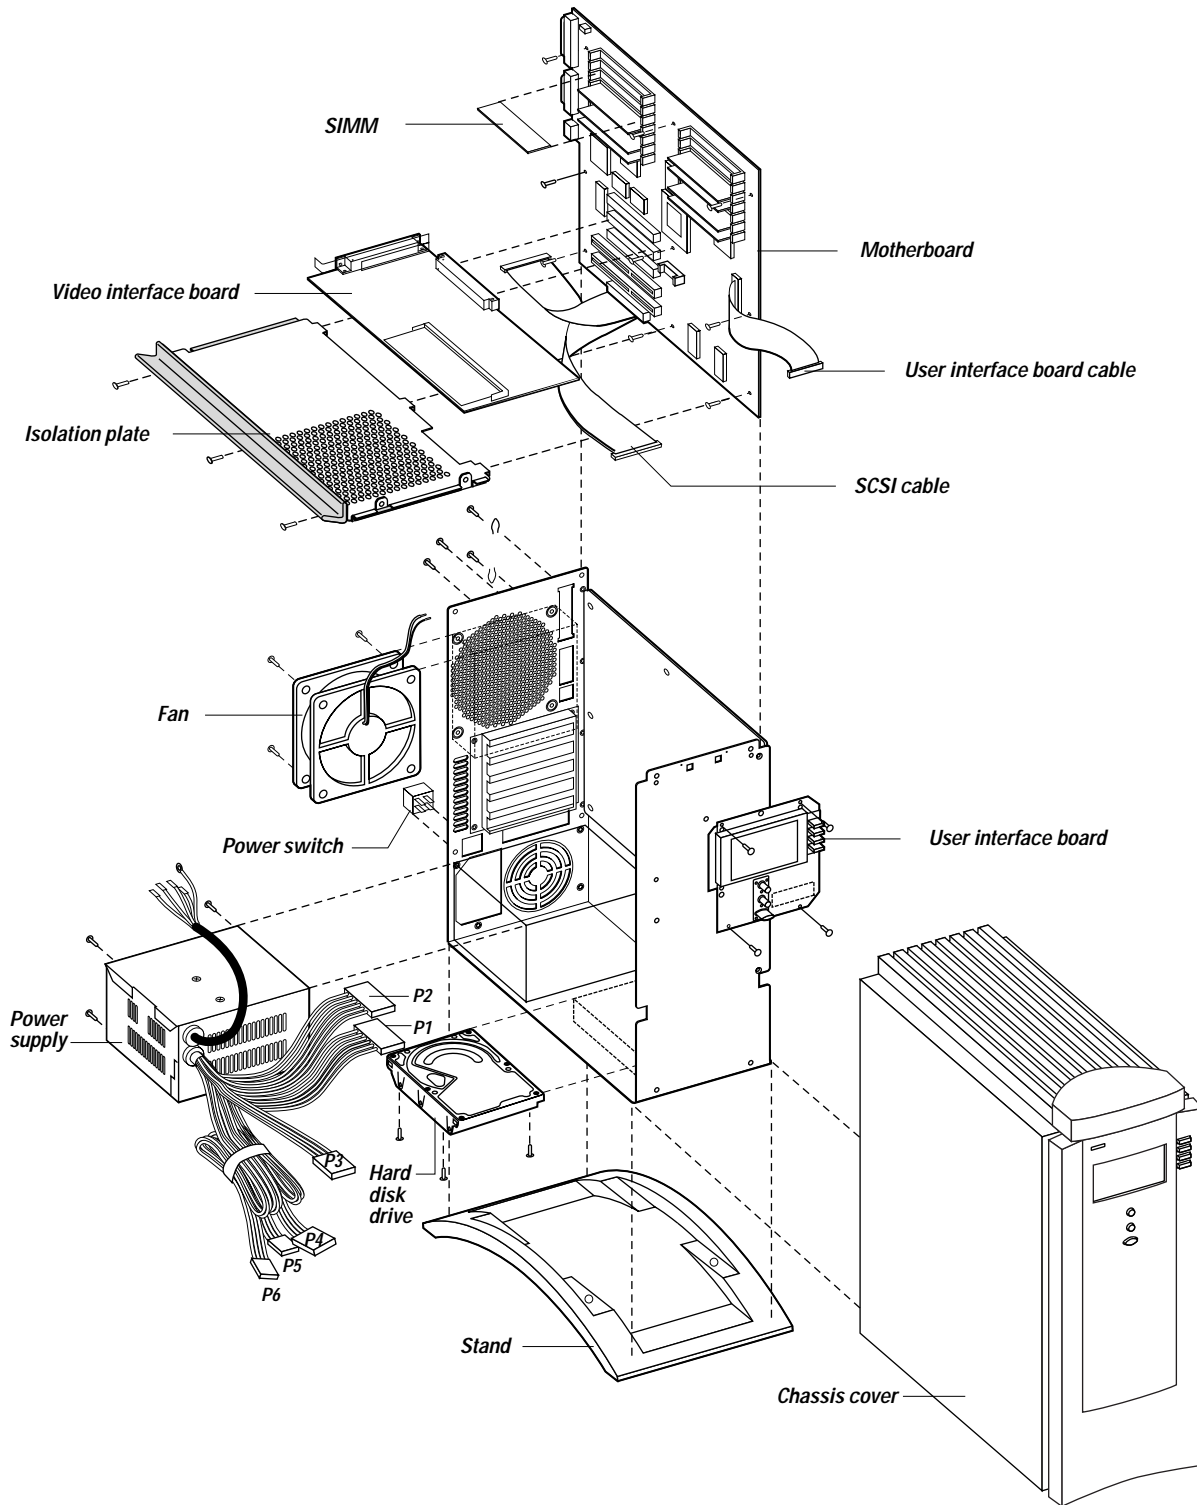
Exploded view of Fiery XJ BP100 system components
